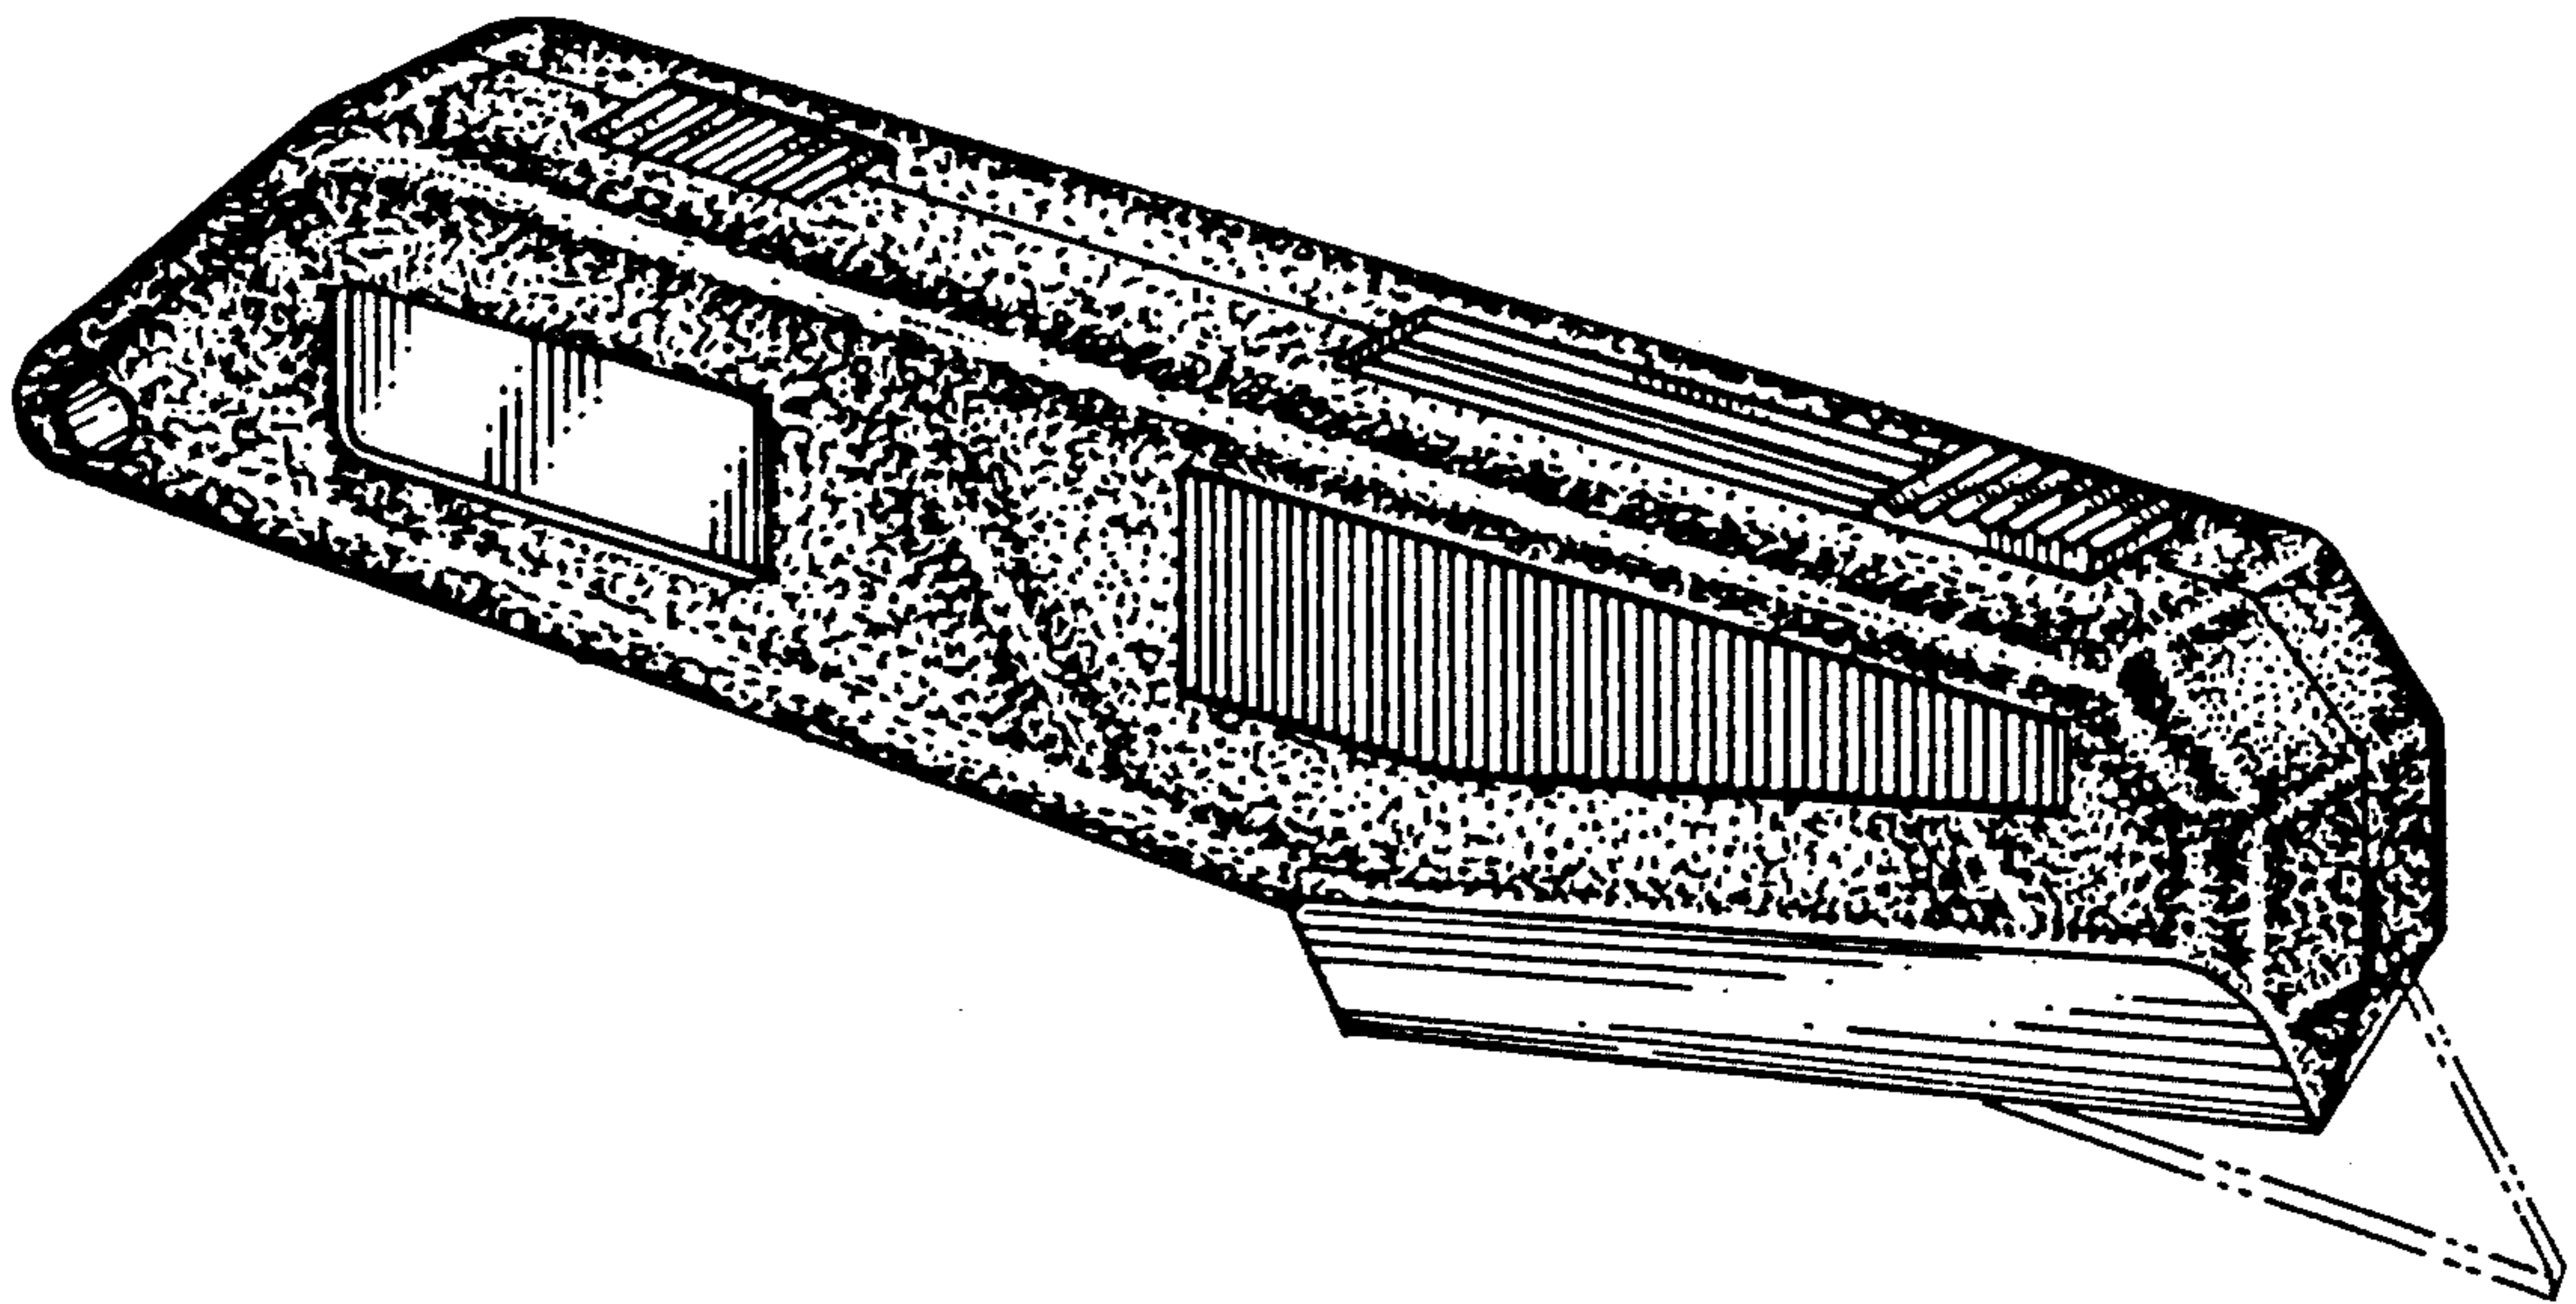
is a right side view of the cutting tool of FIG. 1;
